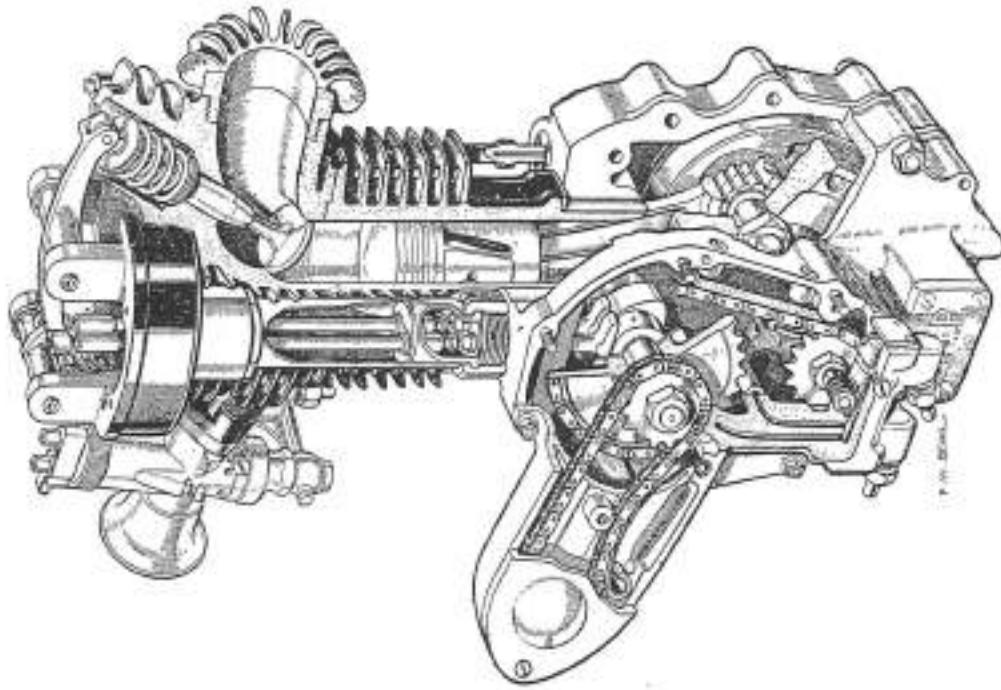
1938 "HIGH CAMSHAFT" ENGINE
